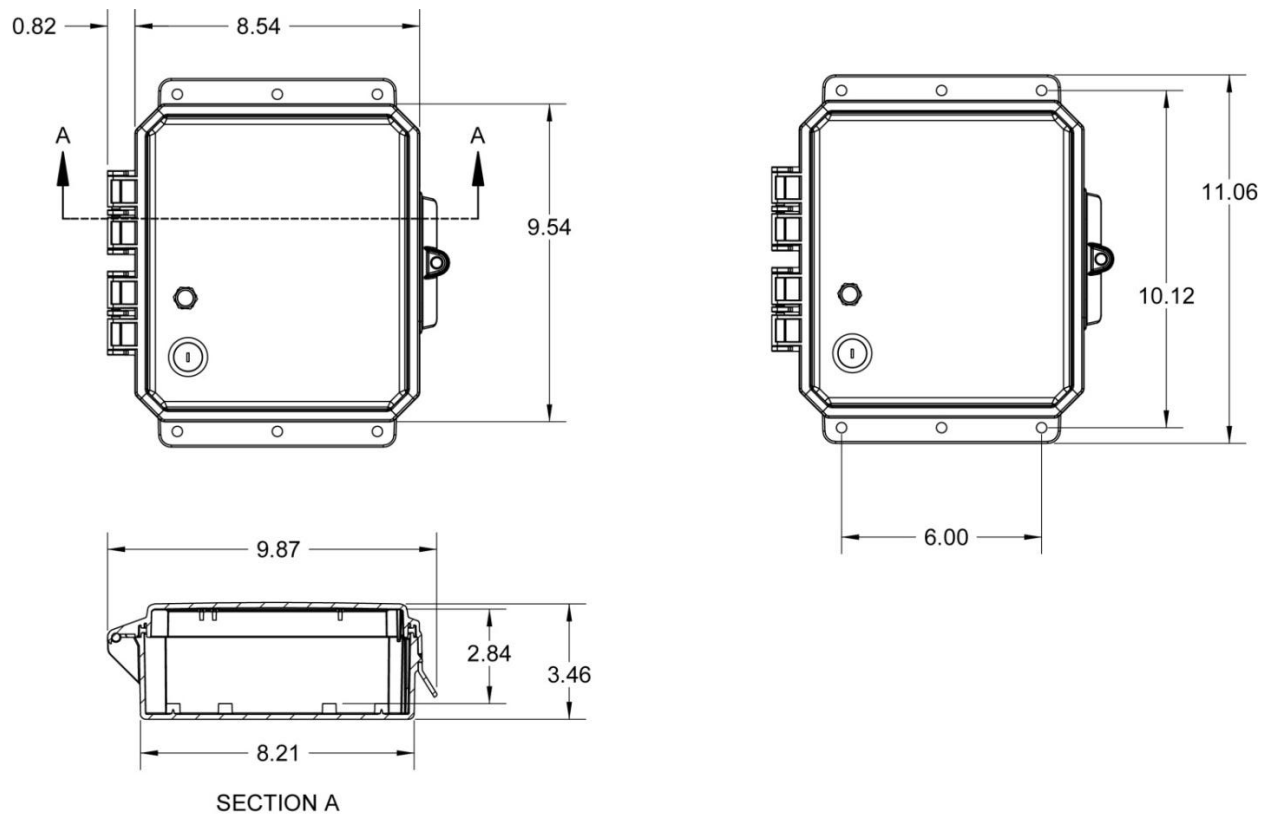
Series 3300/3500 Outdoor (plastic) Enclosure Dimensions, in Inches
